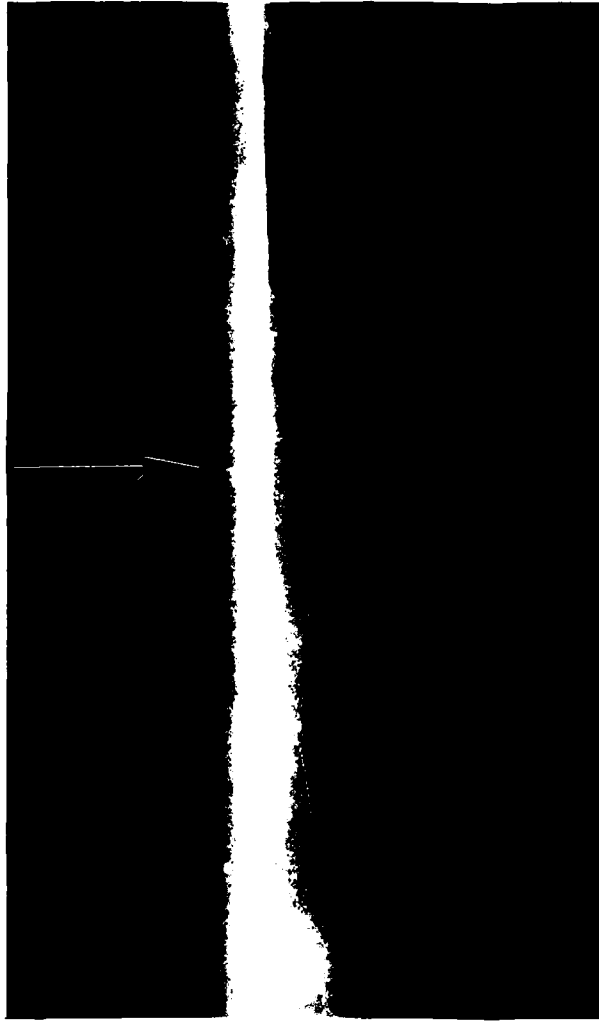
X-Ray of a Weld Section with a Hydrogen Induced Delayed Crack
